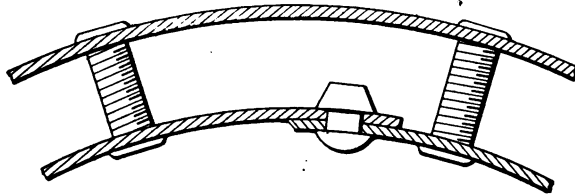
PROPER LOCATION OF STAYBOLTS ADJACENT TO LONGITUDINAL JOINT IN FURNACE SHEET
